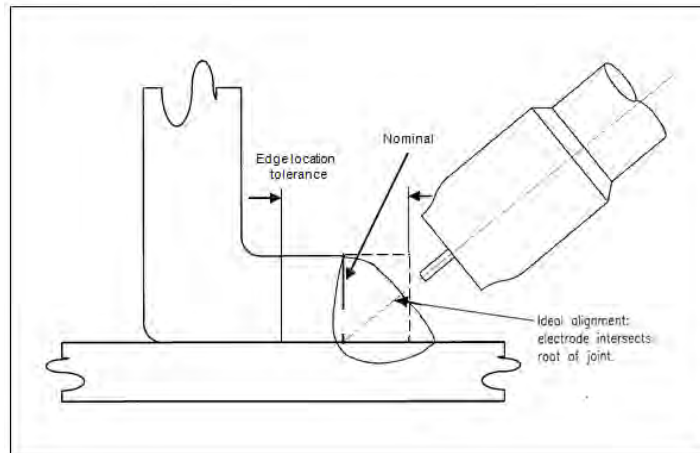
G-7: Edge location tolerance for fillet weld in a lap joint.^{A-12}
